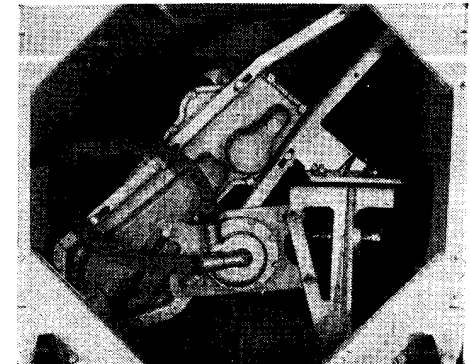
From below: the pump platform is pivoted on a bracket held by two motor cradle fixing bolts
